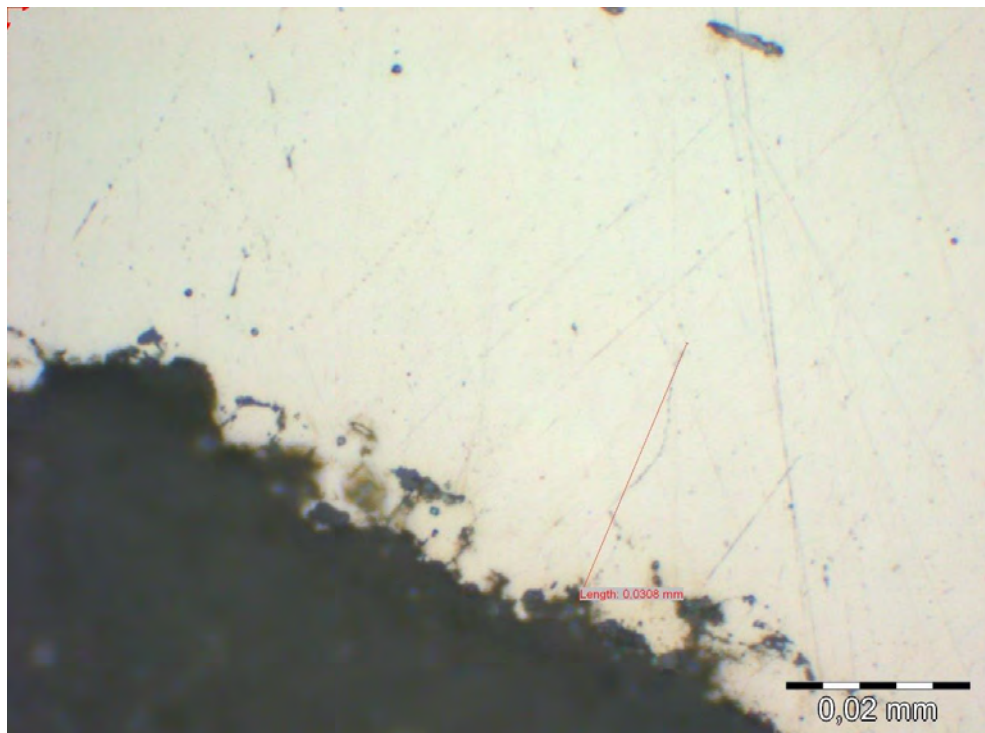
Crack at segment B, fourth ridge on barrel no. SFK 0120-A
